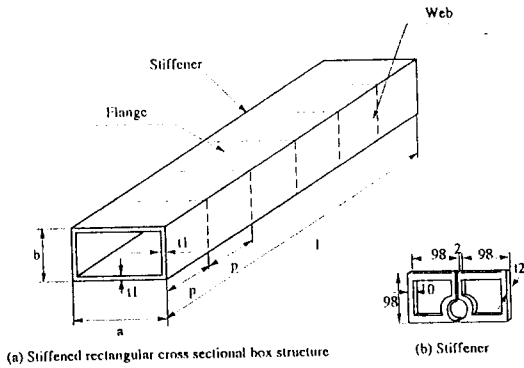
Layout of rectangular cross sectional box structure and stiffener
